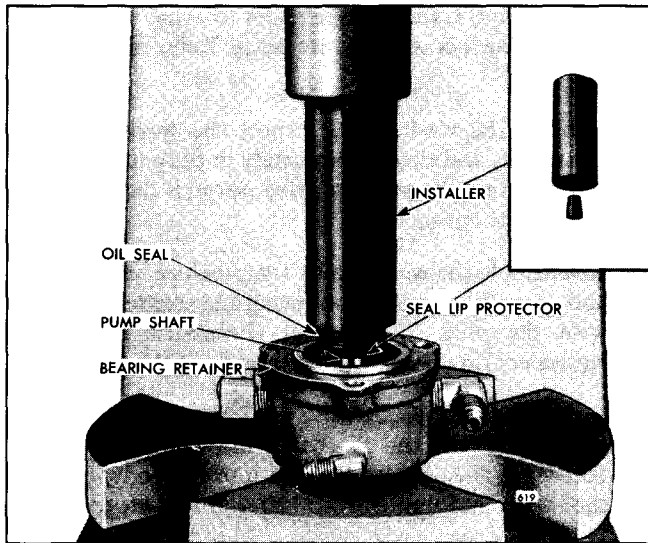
Installing Pump Shaft Oil Seal in Bearing Retainer
